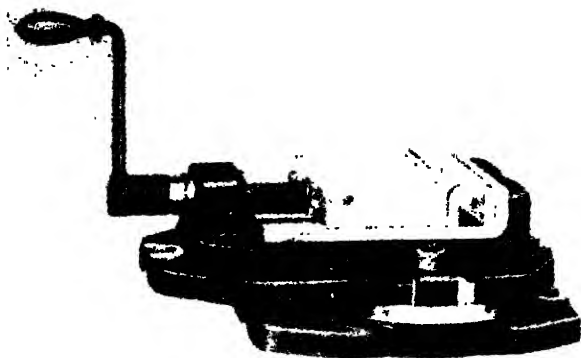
The swivel vise. (*The Brown & Sharpe Manufacturing Company*)
